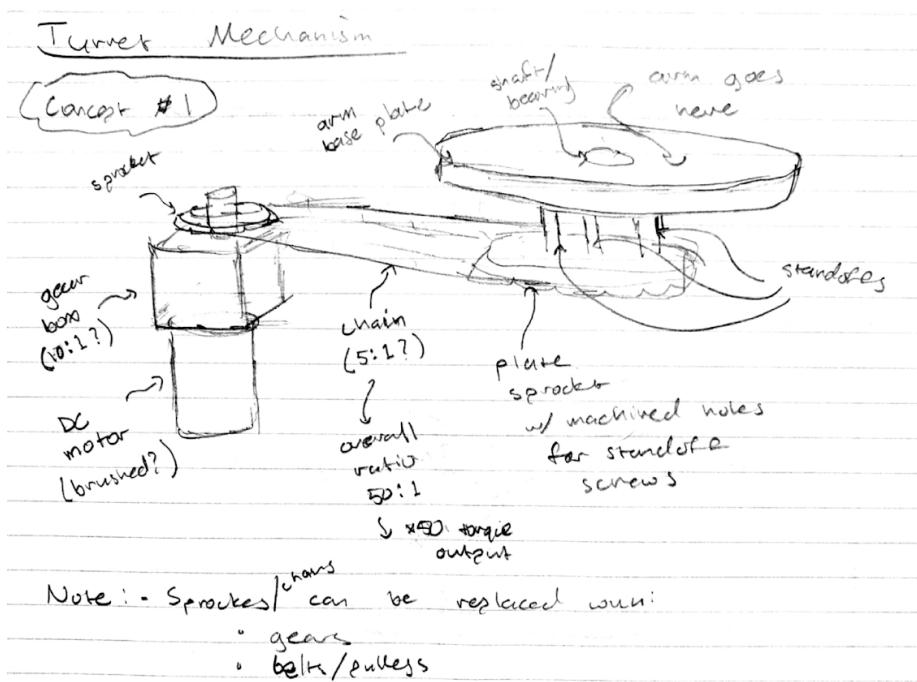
Sprocket Driven Turret with Gearbox Reduction
